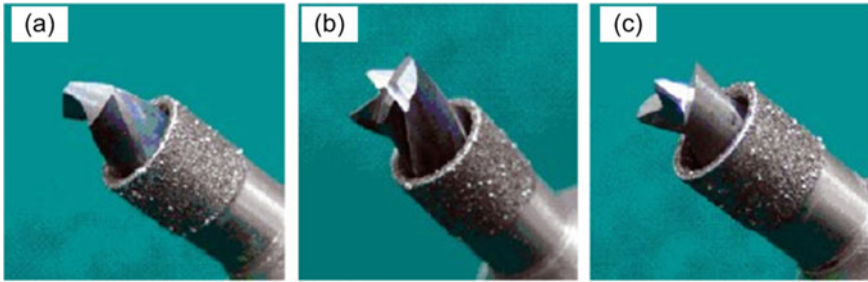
Electroplated diamond drilling-grinding combined cutting tool a step-core-twist drill, b step-core-saw drill, c step-core-candlestick drill [33]
